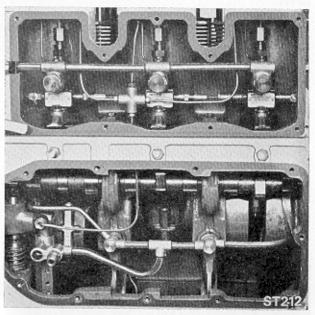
ST/STW3—Oil Pipes (Old type oil pump)
